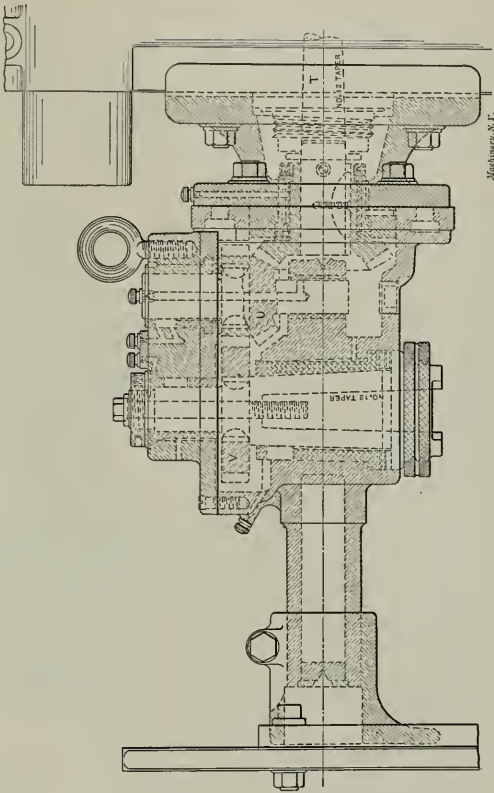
Mechanism of Vertical Milling Attachment shown in Fig. 2.
